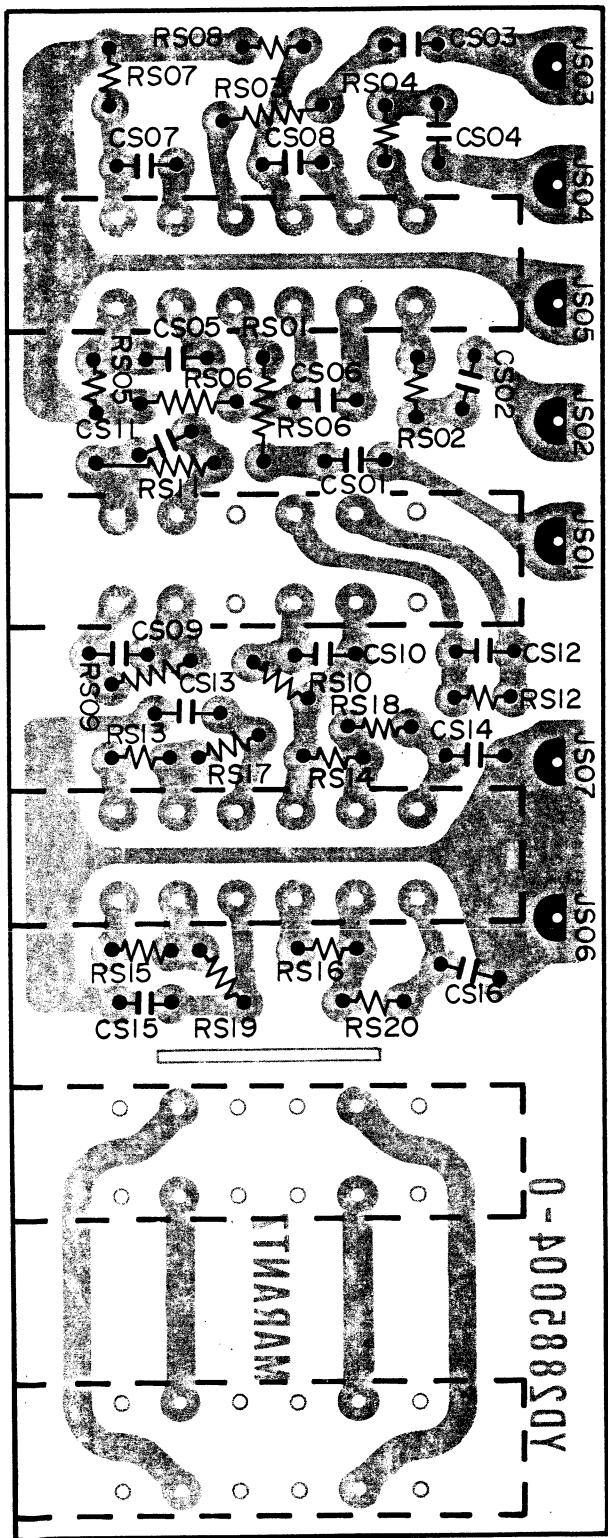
Main-Remote, Hi-Filter and Tape Moni. Switch Unit Assembly PS01 Component Locations
